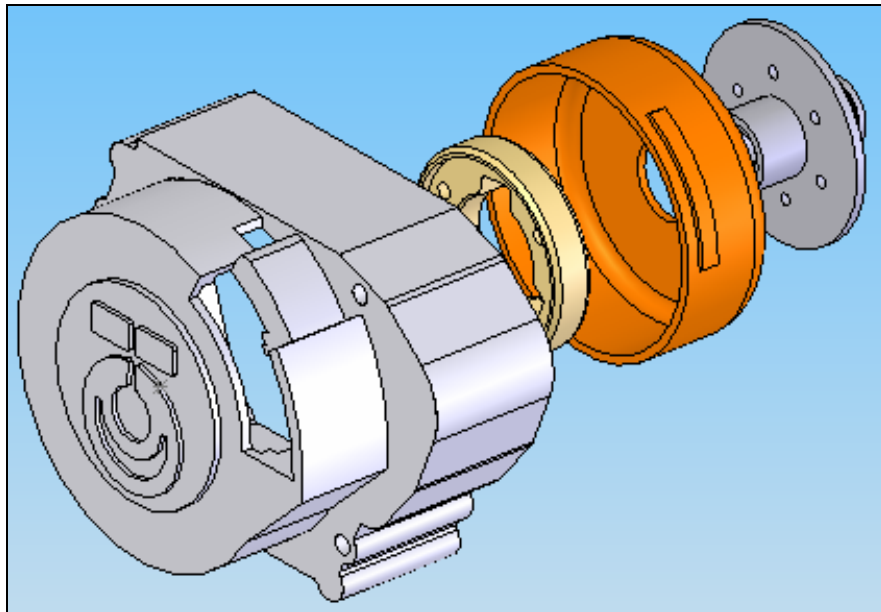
The exploded view showing the ignition system enclosed in the engine's front cover
